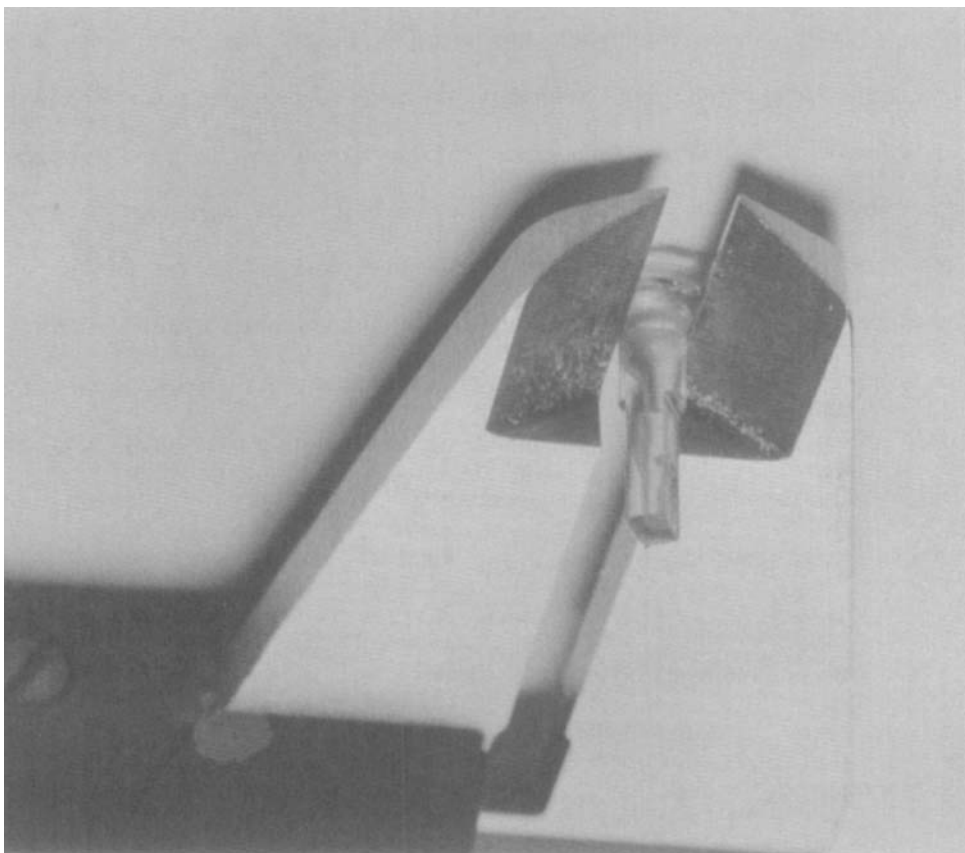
C Measure inside dimension of orifice by determining outside dimension of polyester resin copy.
